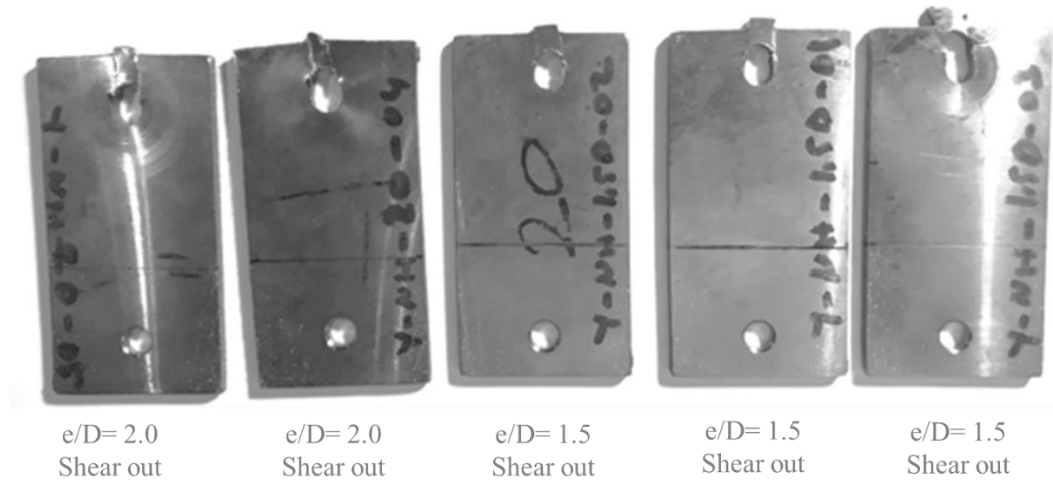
As built T build direction pin-bearing test specimens after fracture.
